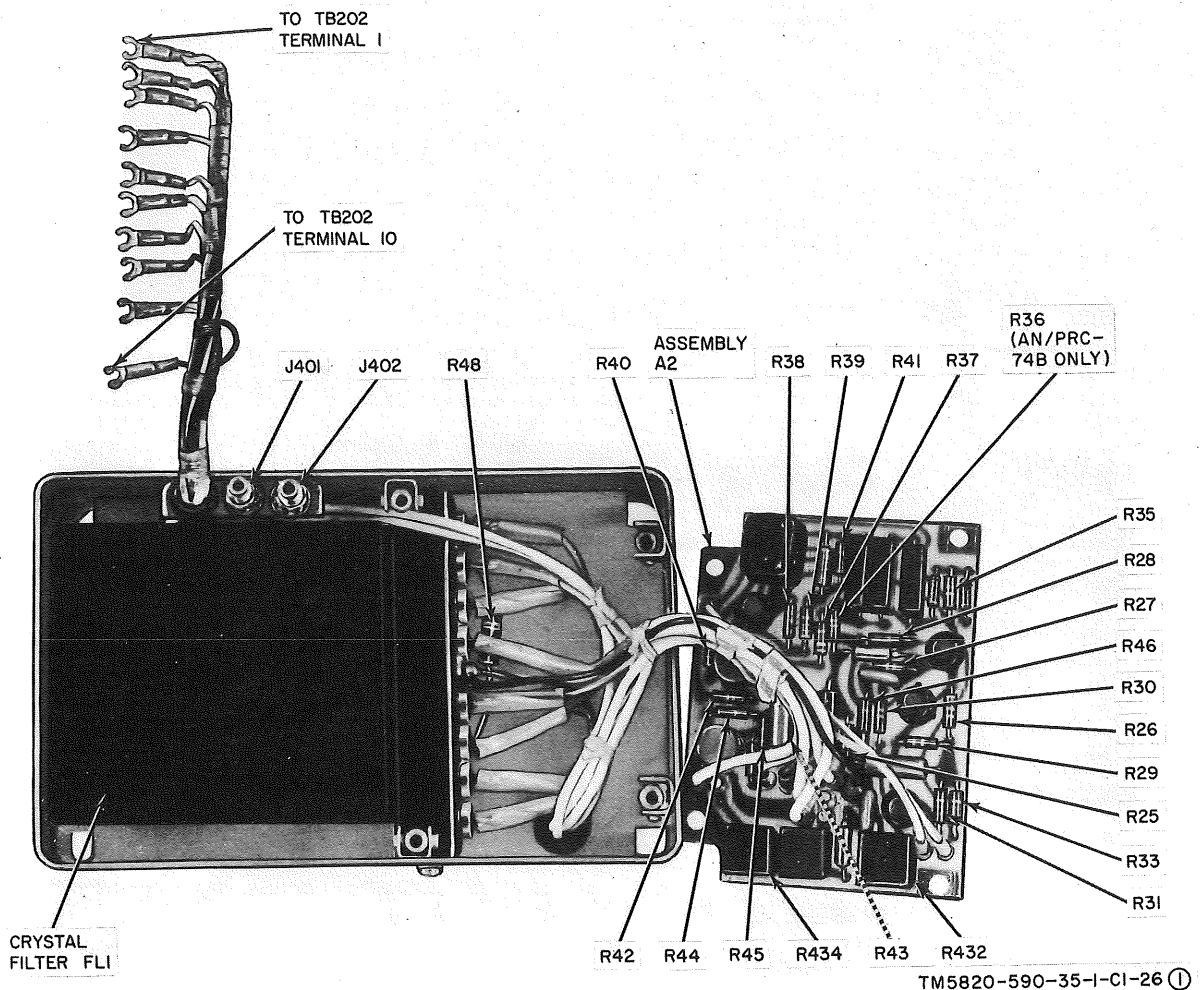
①. IF audio module front view, component boards removed (part 1 of 2).
